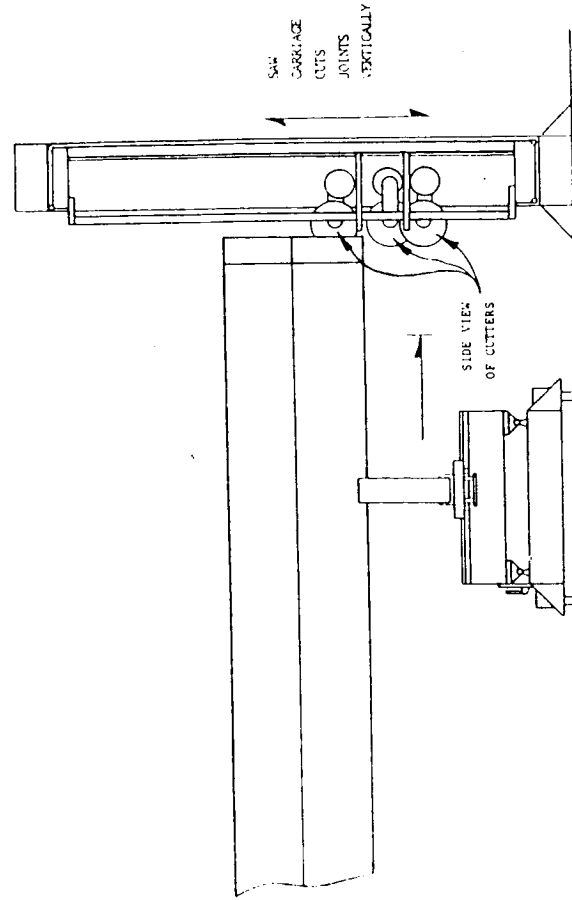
Blade Indexed Into Finger Joint Machine (Production Configuration)
